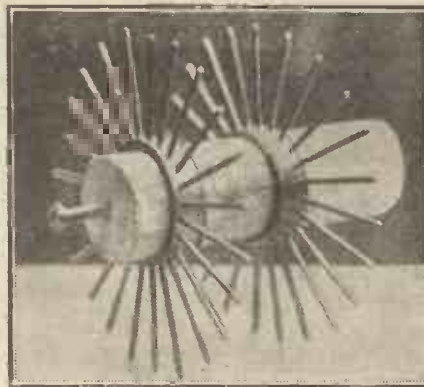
Showing how the commercial coil winding former is divided and mounted.
